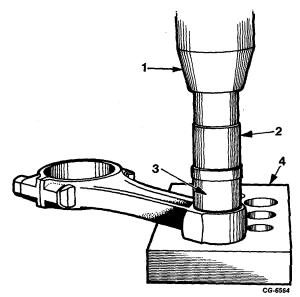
Proper Location of Bushing Split When Installed in Connecting Rod
